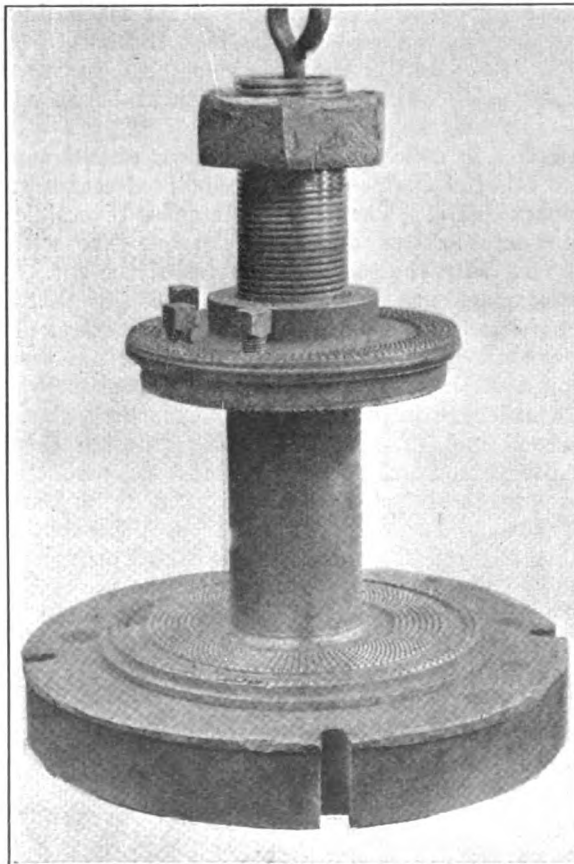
FIXTURE FOR HOLDING CROWN BRASSES
